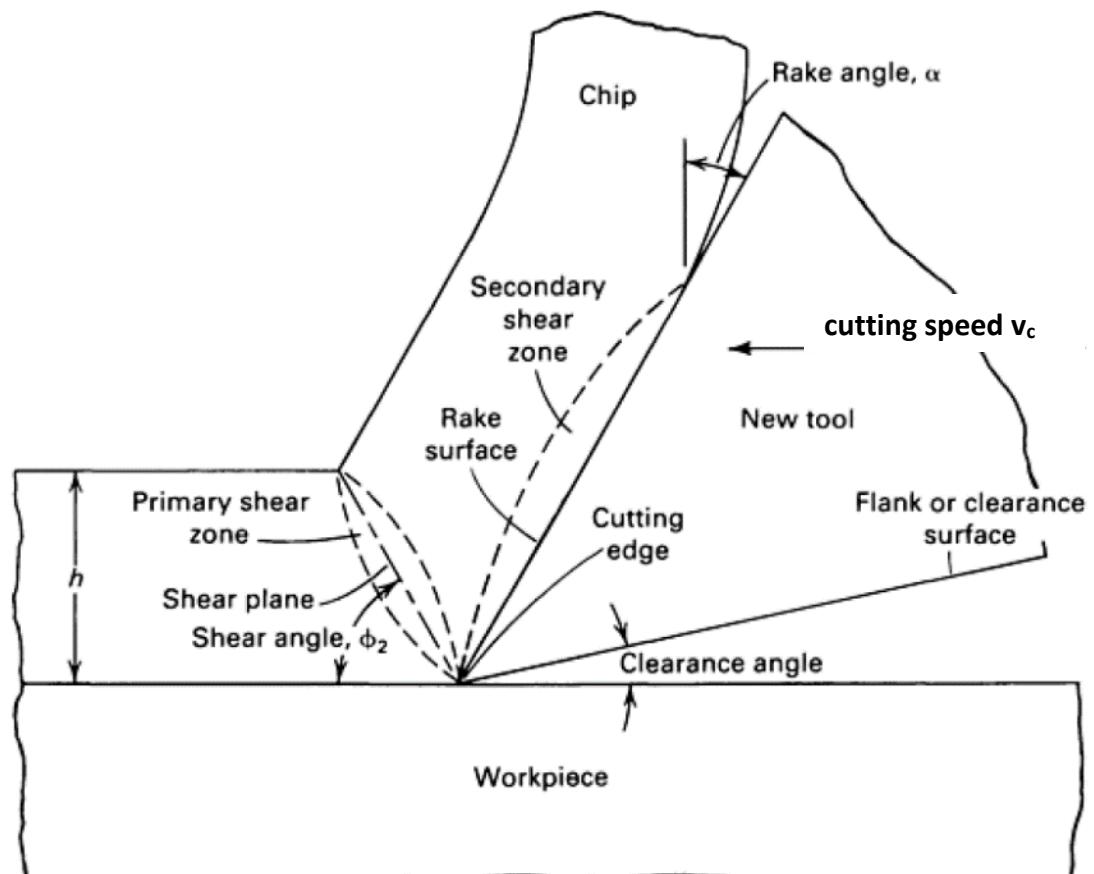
Relations between chip, workpiece and tool [10].
